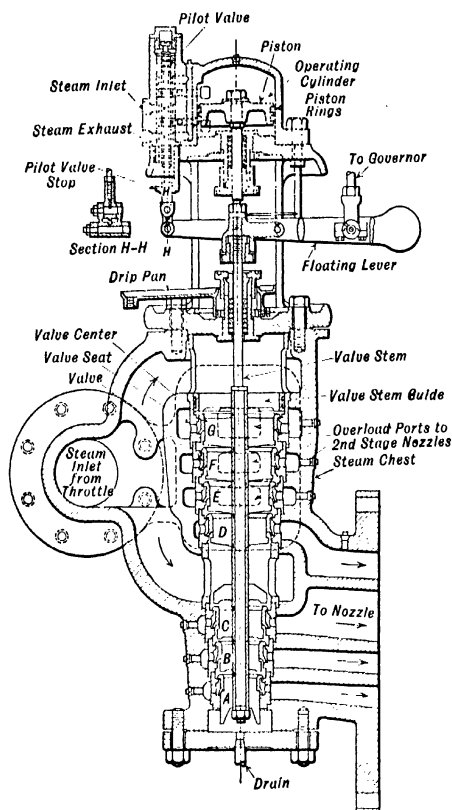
Steam-operated Valve Gear for Curtis Steam Turbine.
